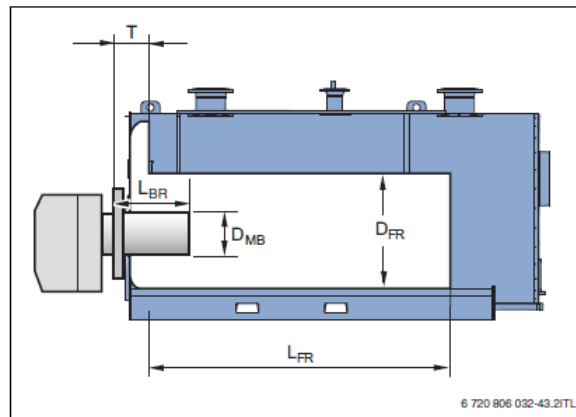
Dimensions, burner door and burner, Uni 3000F¹⁾
